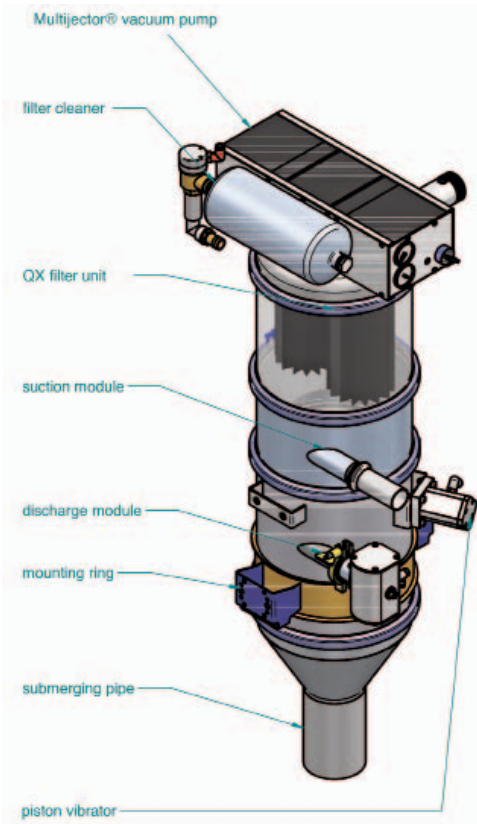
Volkmann Multijector conveyors offer no-tools disassembly/assembly to aid cleaning.
